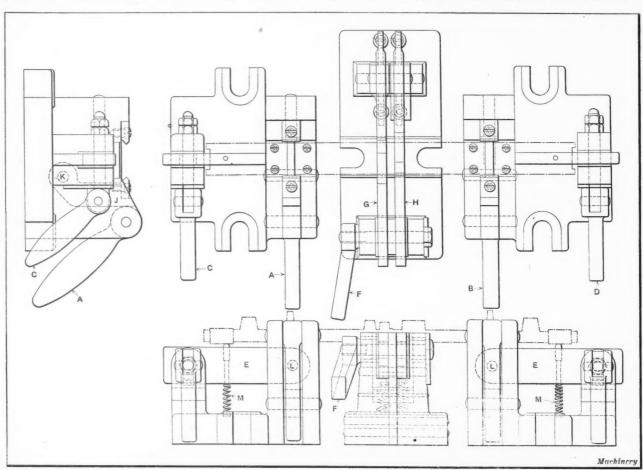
Elevations and Plan Views of Fixtures designed for holding Slender Parts without Distortion
